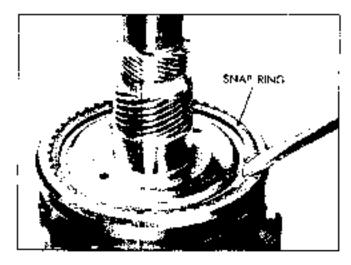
E-54. Removing Outsot Shaft to Carrier Shap Ring
